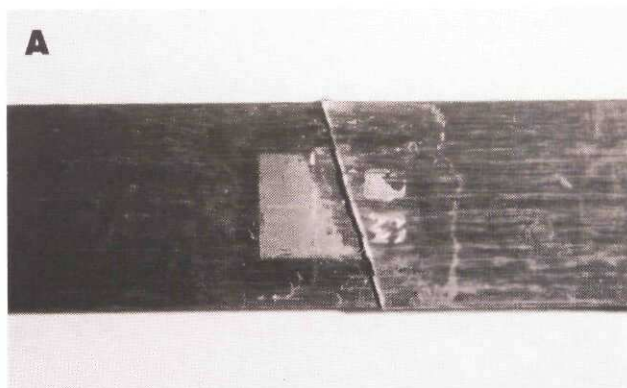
(A) Flat view of the gage section of a unidirectional AS4/APC-2 sandwich specimen failed in four-point flexure, showing the surface in compression. (Specimen width : 12.7 mm)
